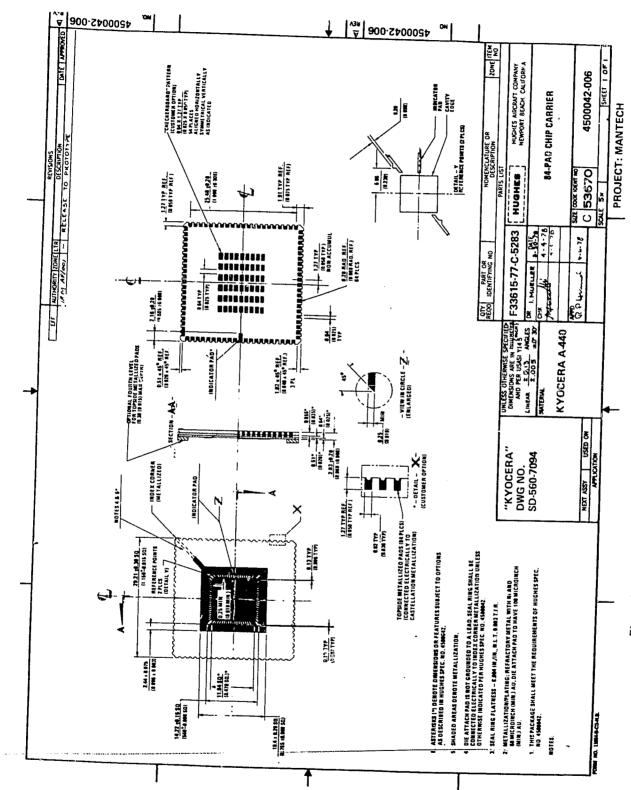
Outline drawing of 84-pad HCC package (Hughes Type 4500042-606).
